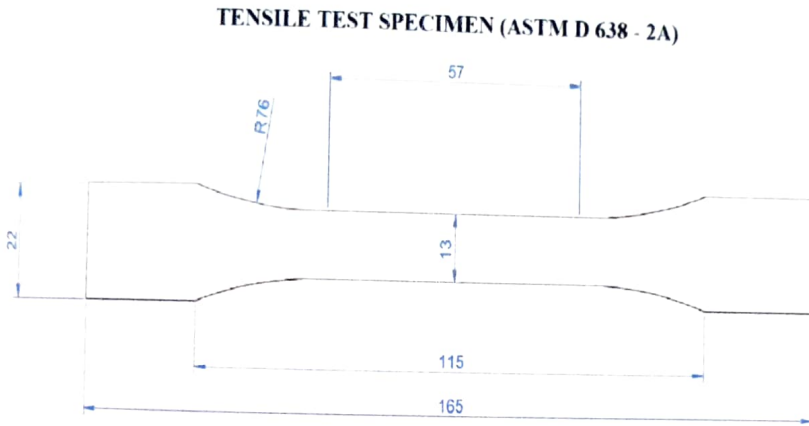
Tensile test specimen with ASTM standards in CAD
